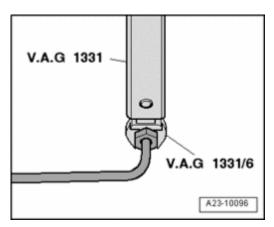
Tightening SW 17 Union Nut At Fuel Rail Using Torque Wrench V.A.G 1331 With SW 17
